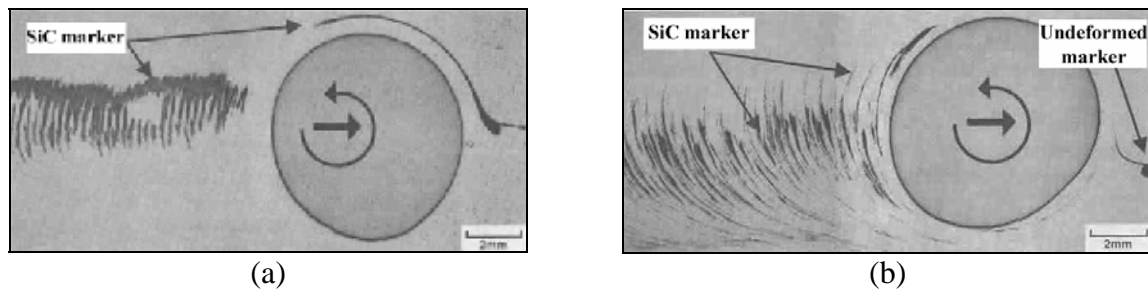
Metallographic sections at the sheet mid-thickness of the 7050-T7541 weld, showing (a) the streaky fashion forming at the wake of the tool for MM placed at the weld centreline, and (b) the wide dispersion of the AS MM behind the tool [45]
